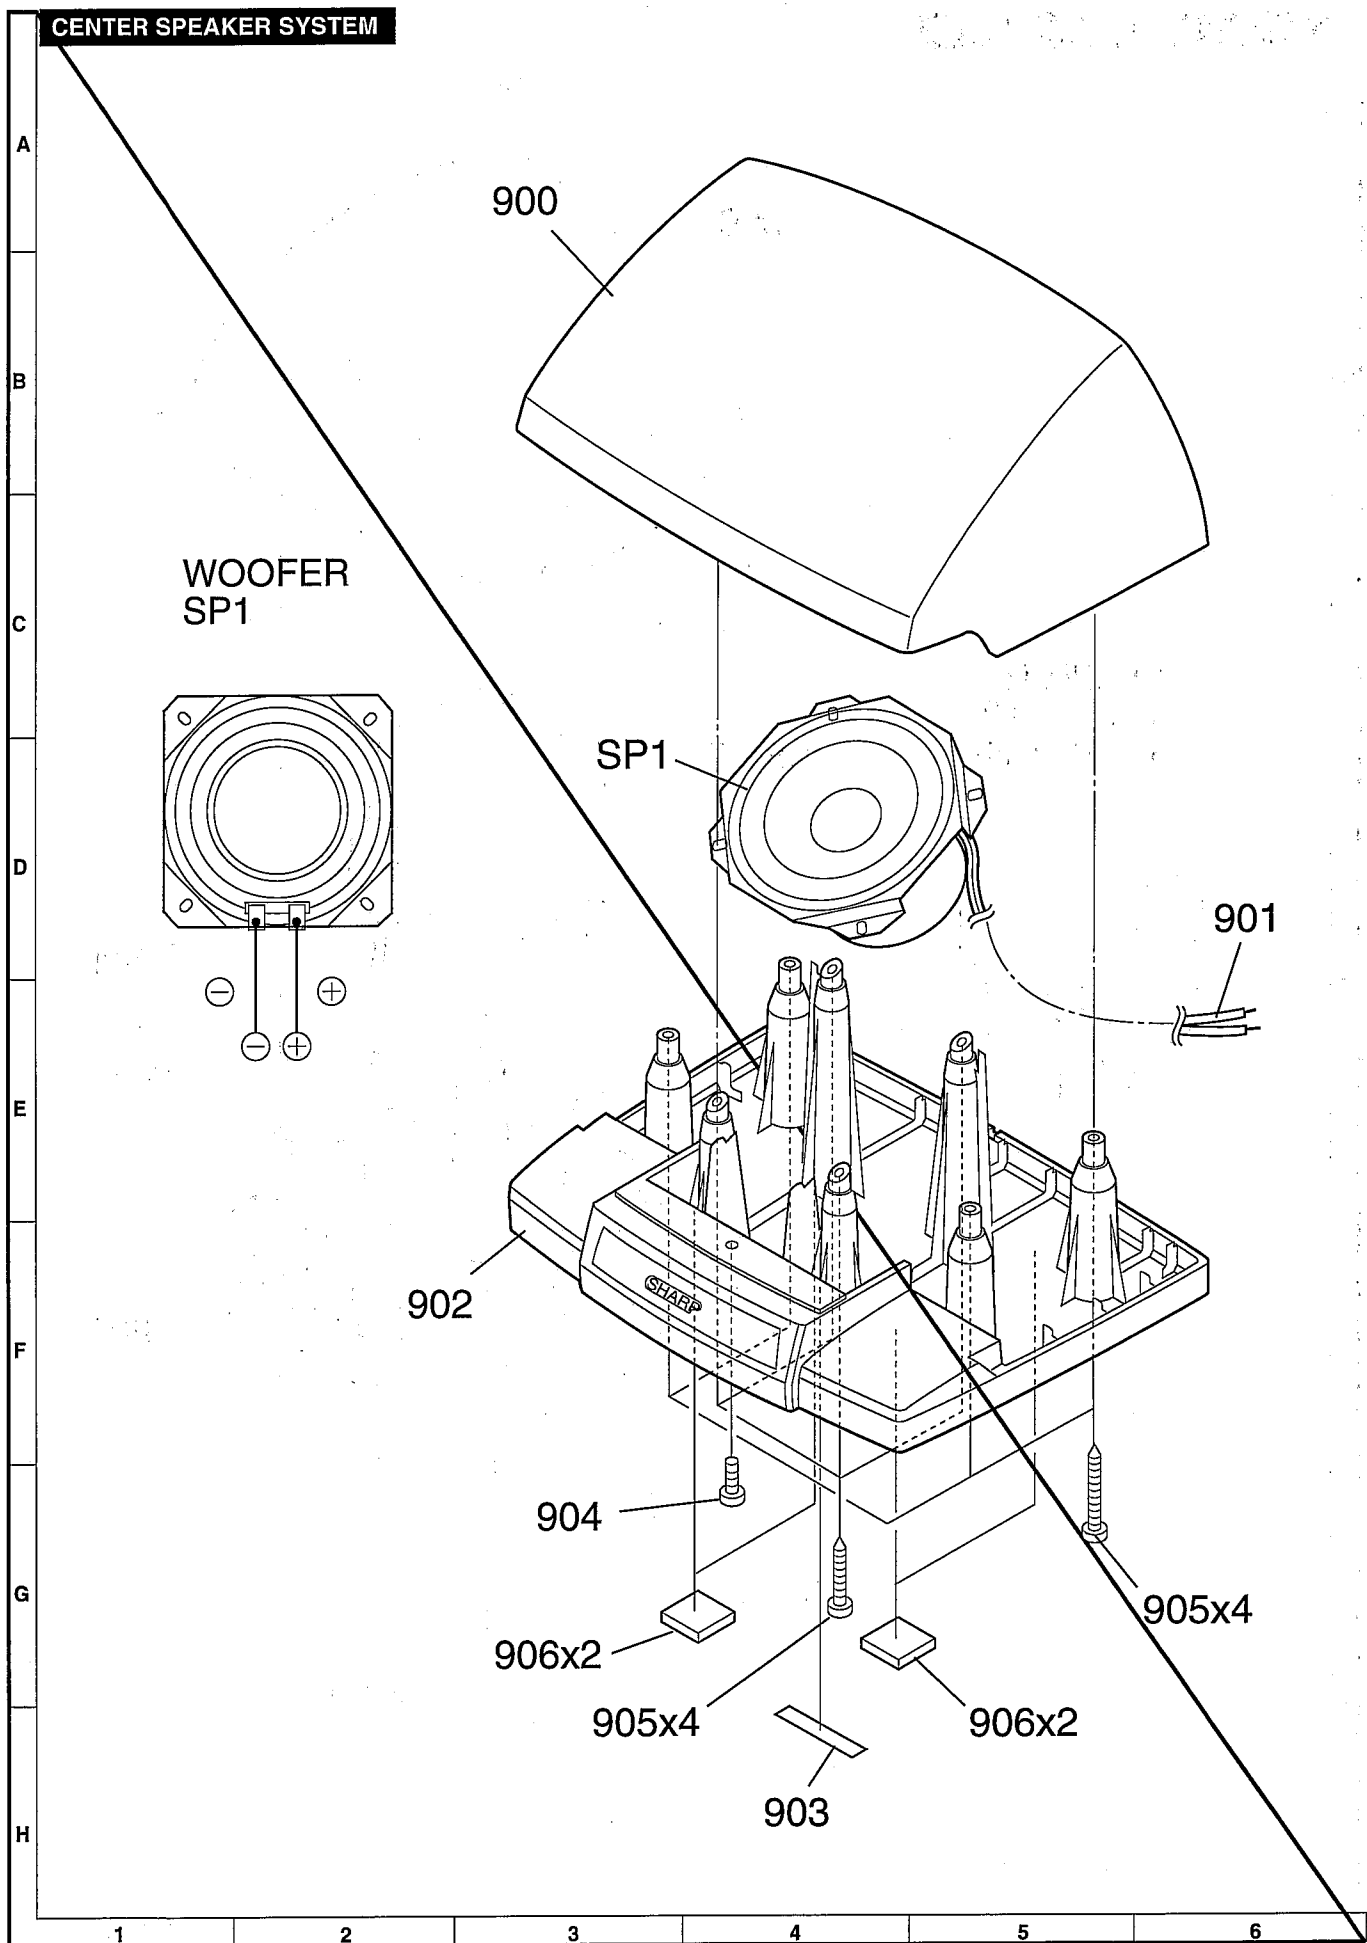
SPEAKER EXPLODED VIEW (2/2)
